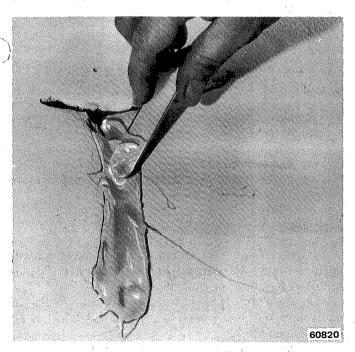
L-8 Applying Structural Adhesive to Fractured Area
